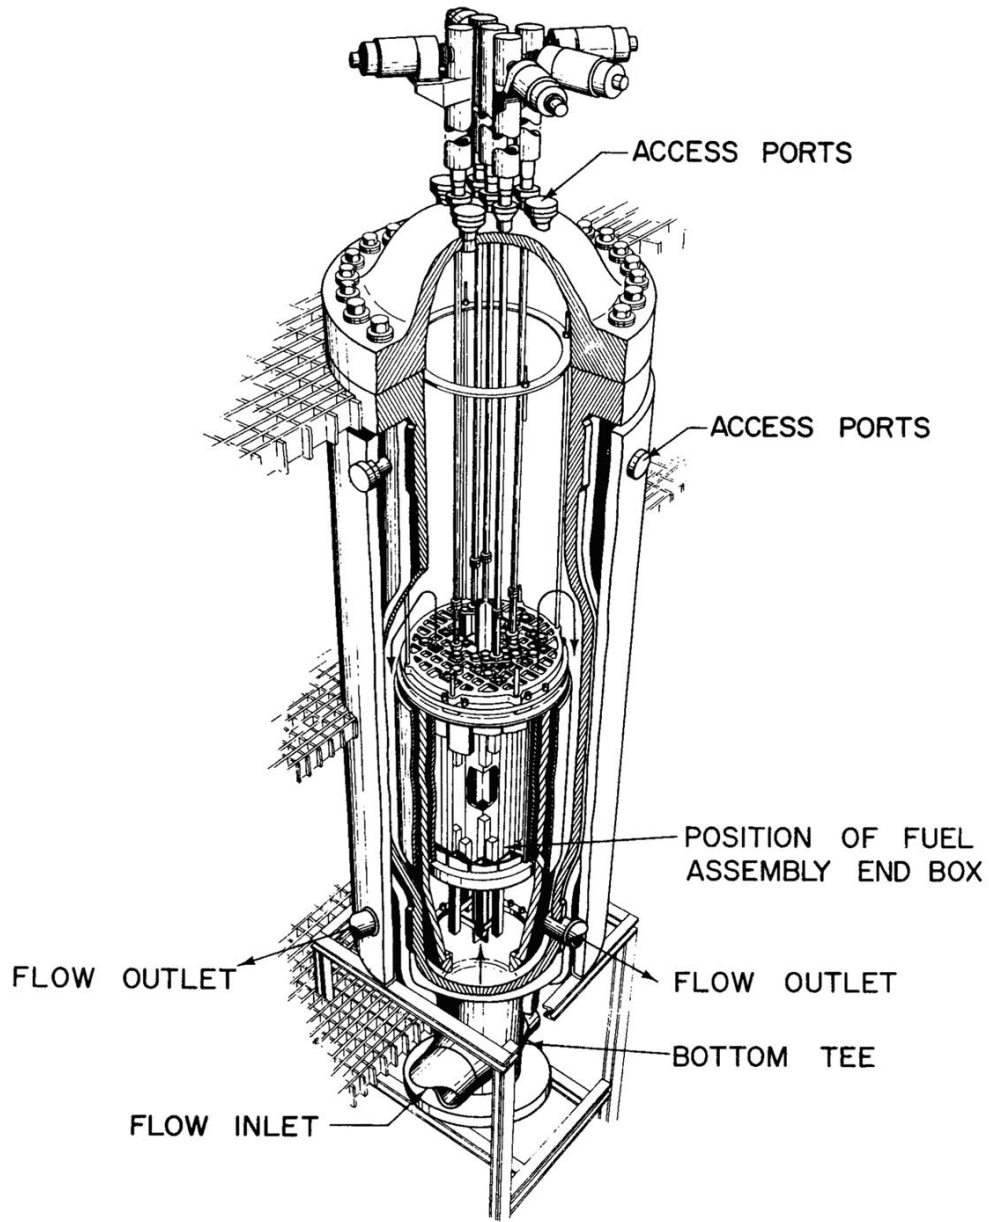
Cutaway Drawing of the Spert III Facility with the C-Core Installed (Ref. A-32)
